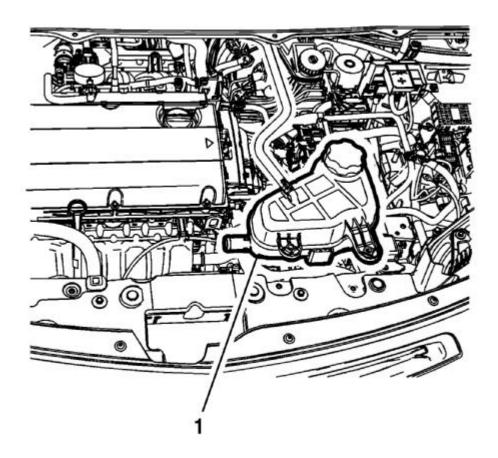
Heater Outlet Hose Courtesy of GENERAL MOTORS COMPANY
